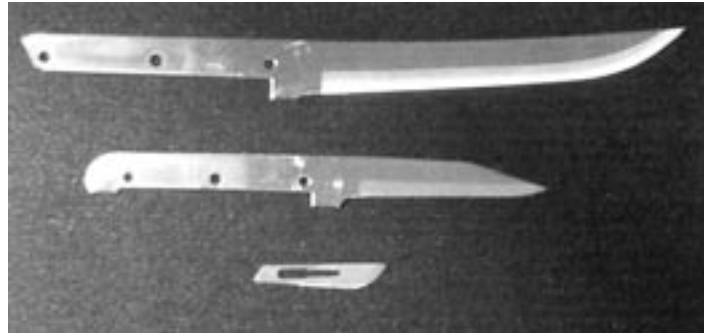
Photograph illustrating sample knife blades with handles removed, beginning with the utility knife, paring knife, scalpel blade, and knife holder (top to bottom).
